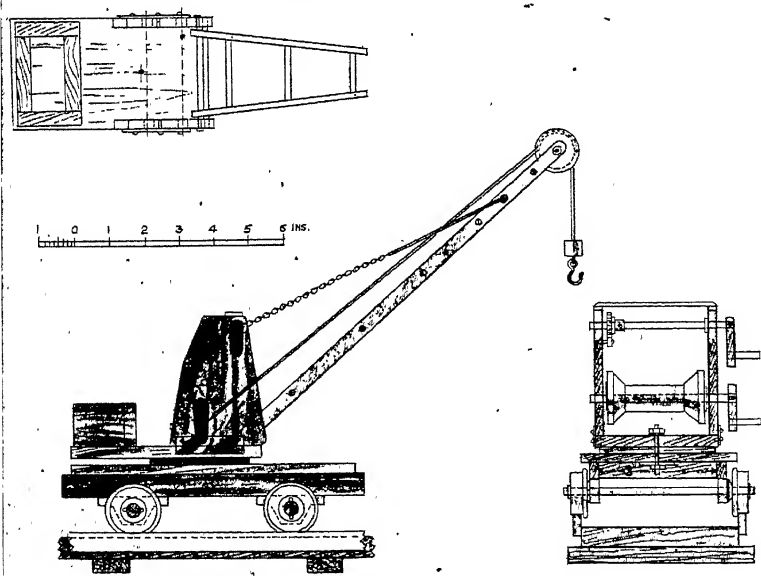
Plan, and Side and End Elevations of the Miniature Road Crane.
